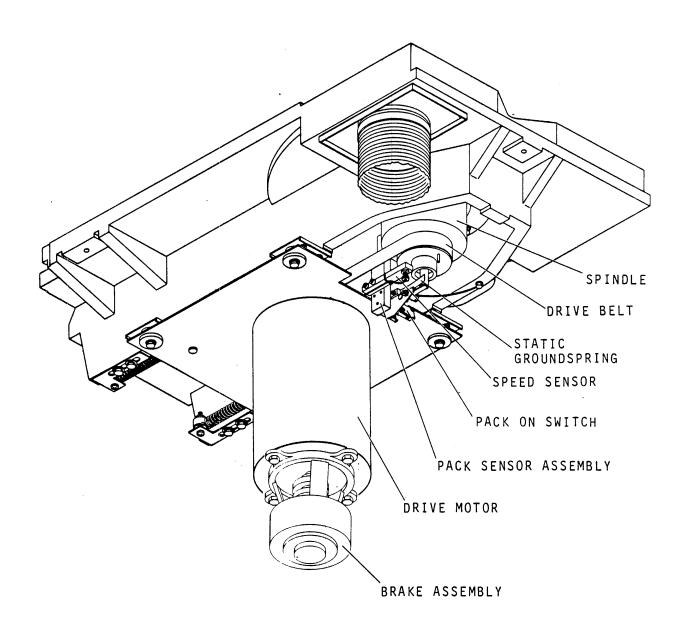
Assembly Locator (VDE) (Sheet 1 of 2)
